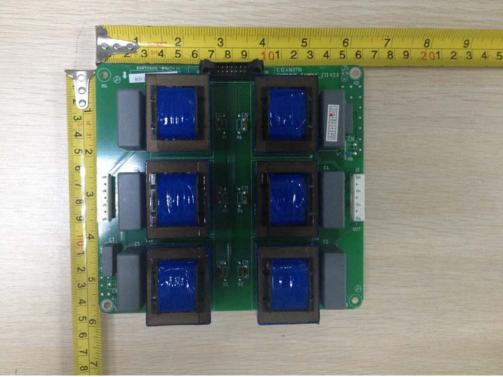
BYP&OUT-SAMPLE-C13 board component view
